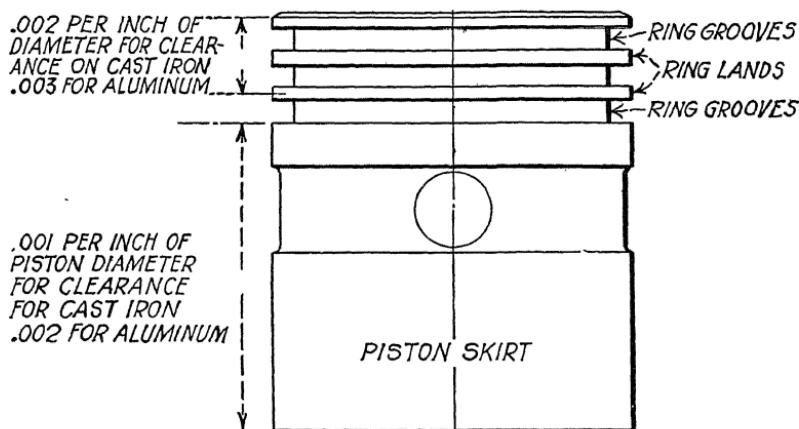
Nomenclature of Piston Parts and Rule for Piston Clearance
